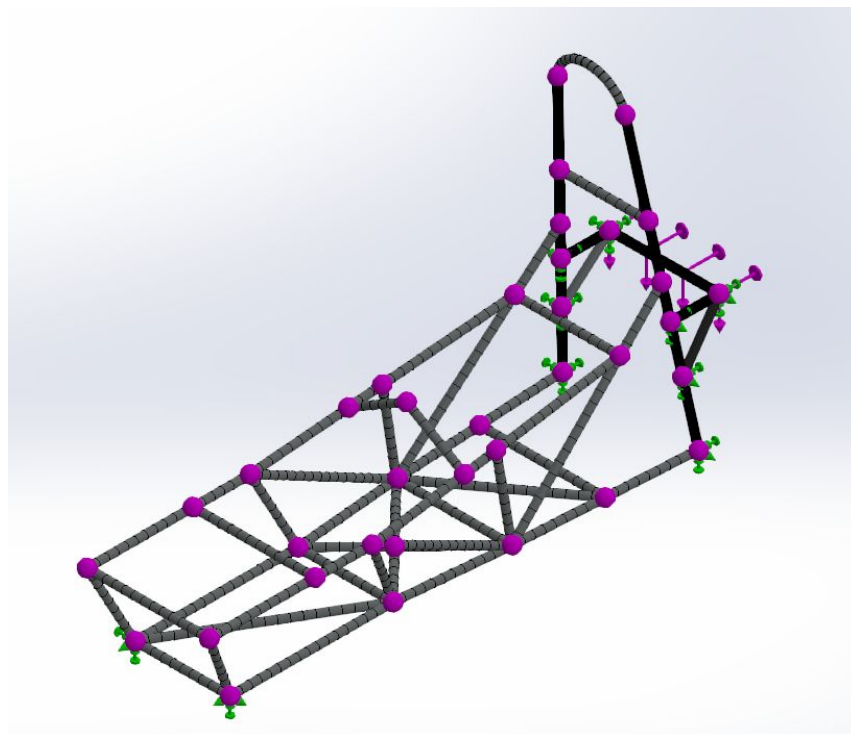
Solidworks Mesh with Fixtures, Joints, and Constraints
